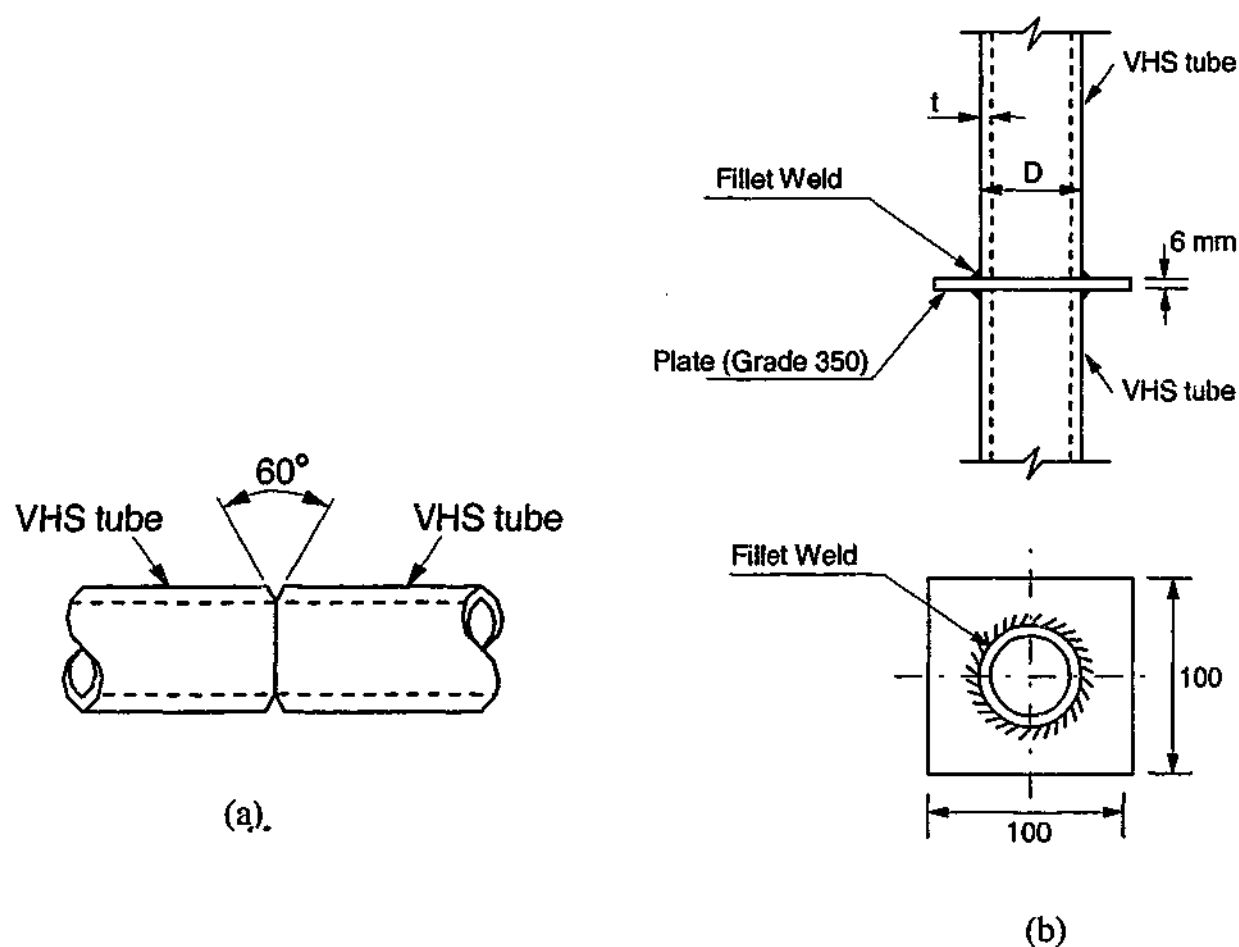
A schematic view of joint preparation: (a) complete penetration butt-welded VHS tubes (b) VHS tubes fillet-welded to a steel plate along the whole perimeter
